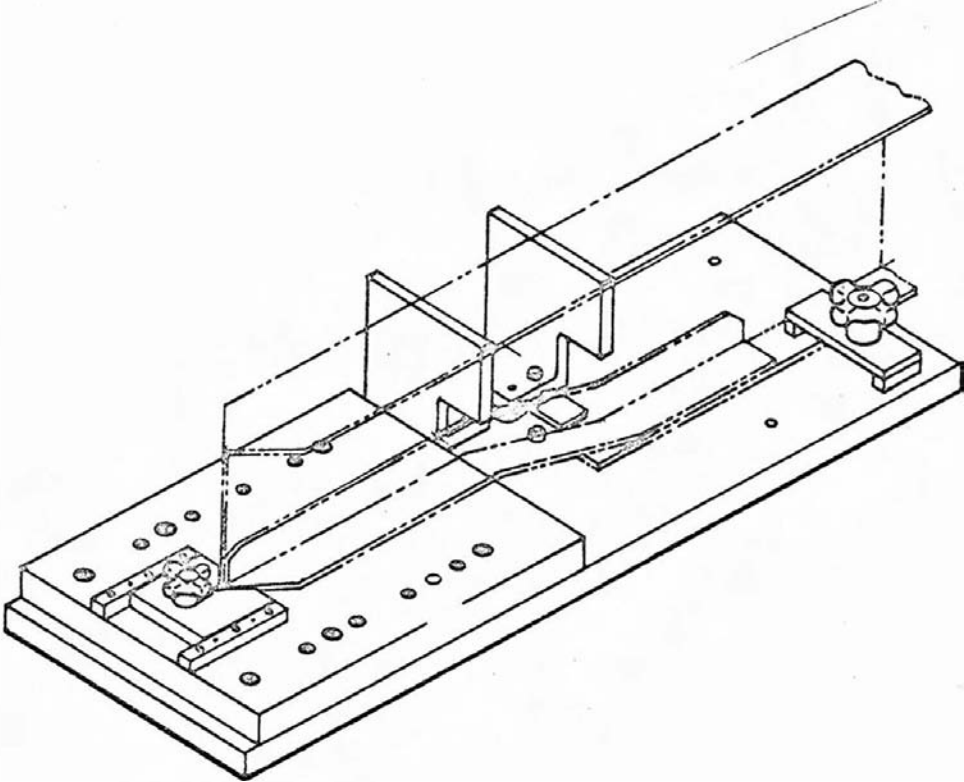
6. Base Heatshield Beam Assembly, Assembly Fixture
